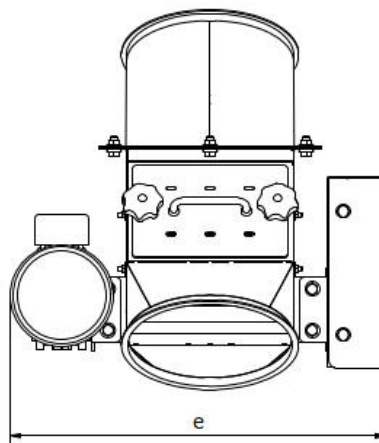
Side view -Asymmetrical with electric motor drive (E-).
